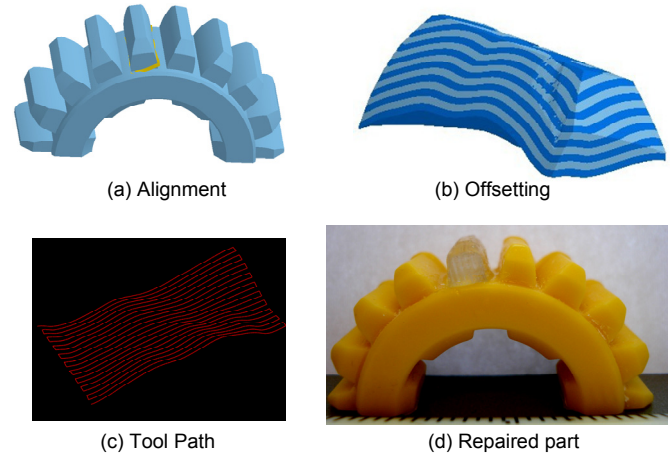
Fabrication process based on a scanned surface. (a) Alignment of the surface with the gear model; (b) offsetting results for 15 accumulation layers; (c) the tool path of a layer; (d) the repaired gear.
